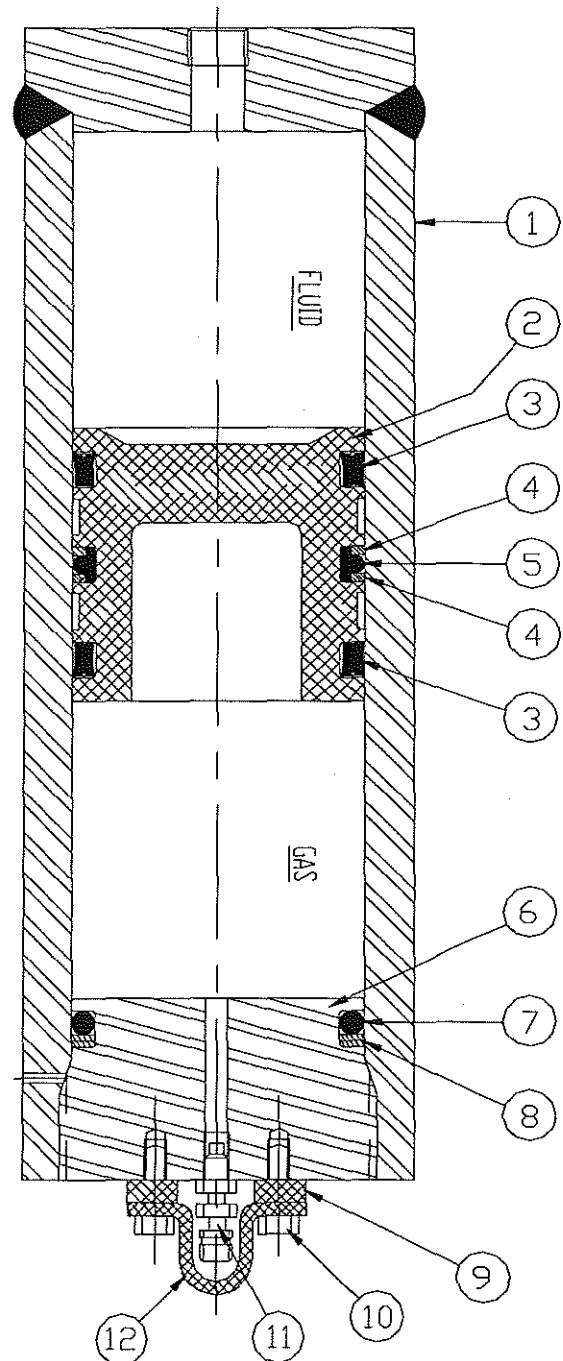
ACCUMULATOR ASSEMBLY - LATER VERSION
